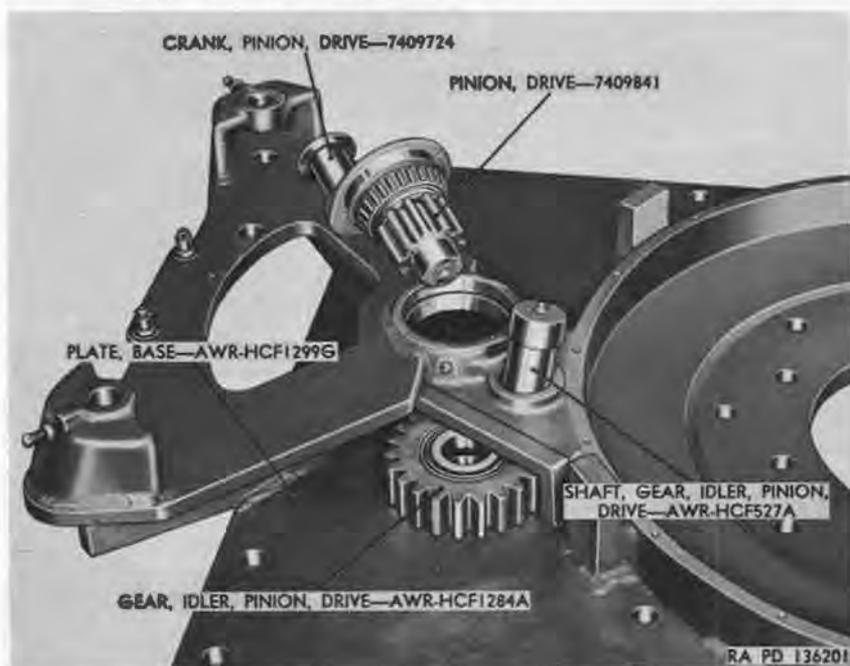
Pivot post drive pinion and drive pinion idler gear removed
